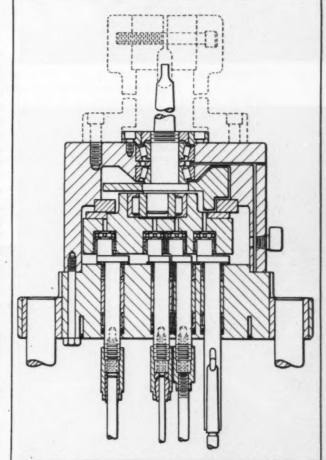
Cross-sectional drawing of a typical gearless, multiple-spindle drill head having fixed center distances between drills
